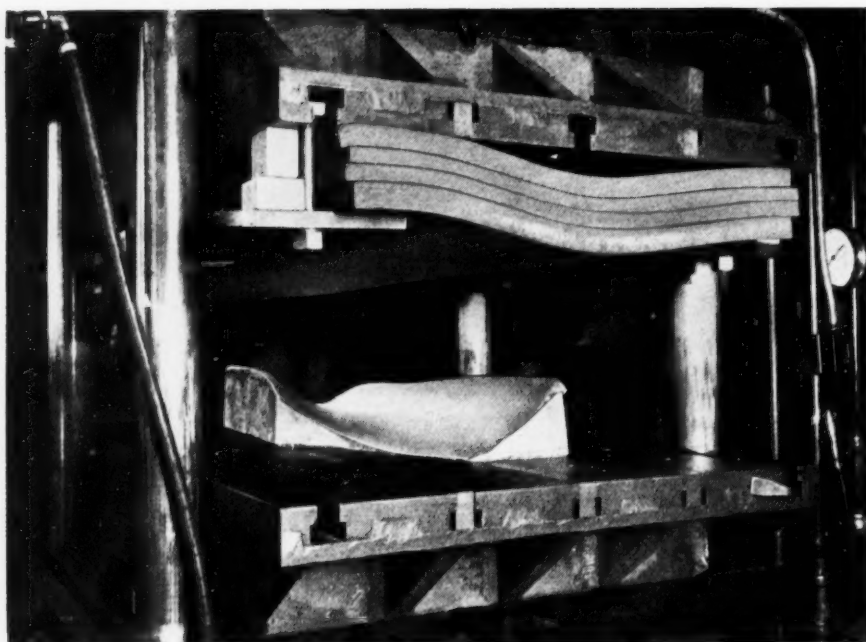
Rubber Pads are Used on a Hydraulic Press to Shape Sheet Aluminum to the Contour of Zinc Dies
